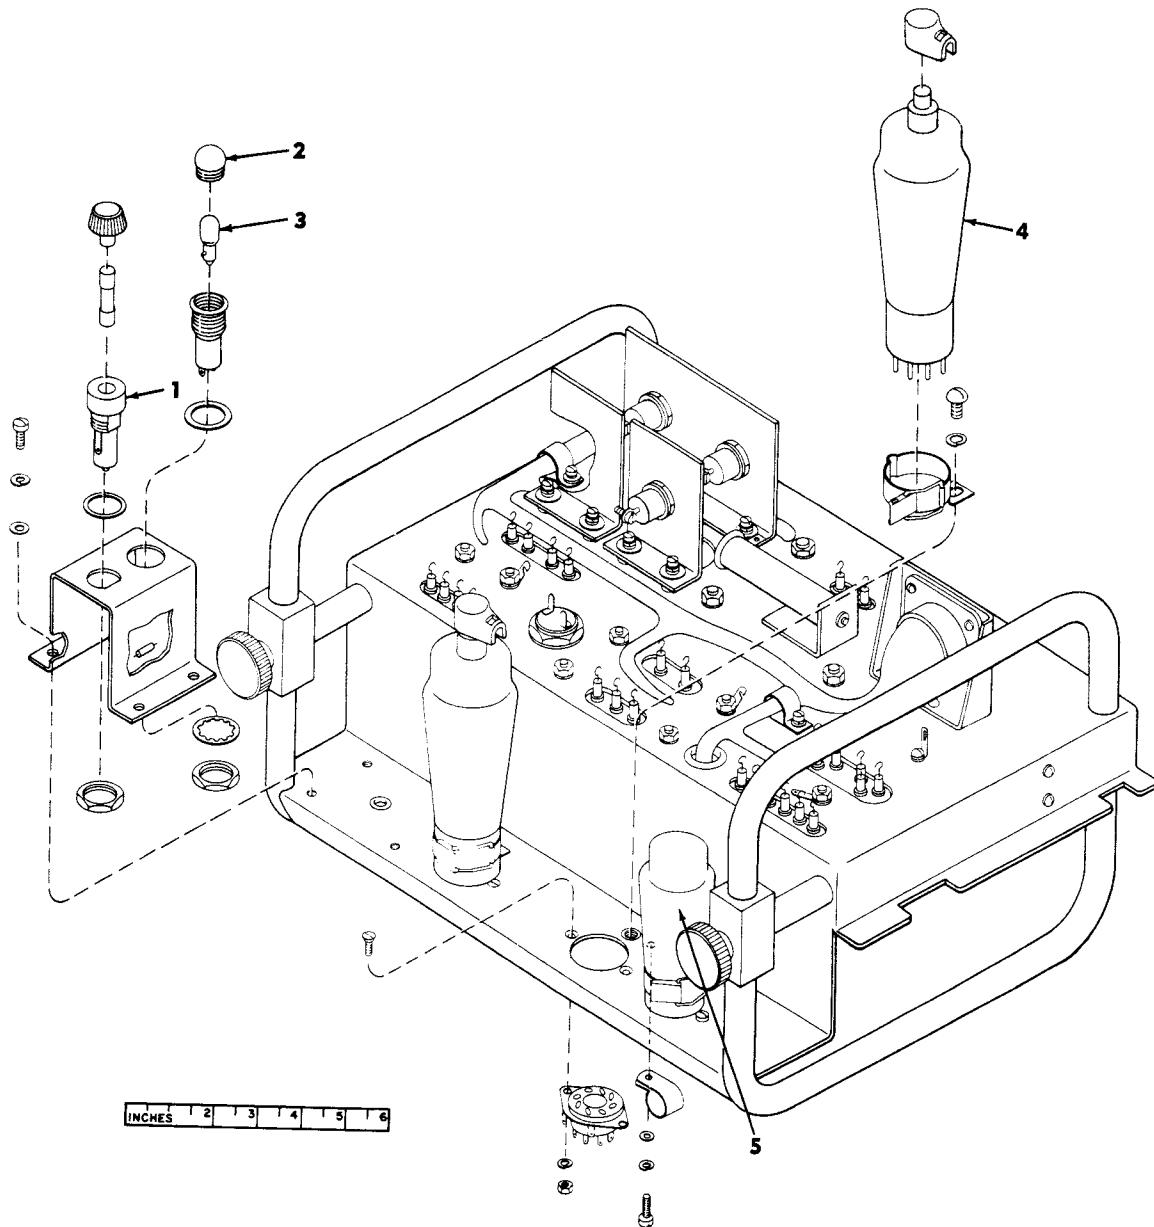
Regulator, voltage CN-281/M (7620552)—partial exploded view
